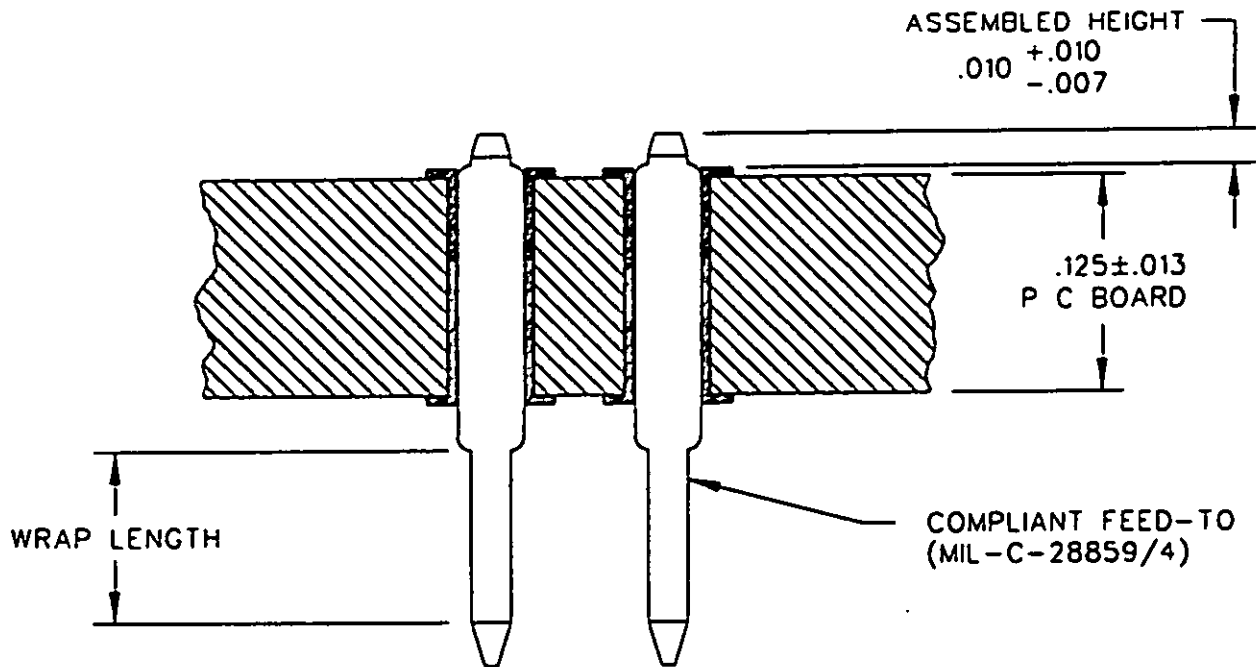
Cross-sectional view of printed-wiring electrical backplane assembly - Continued.
